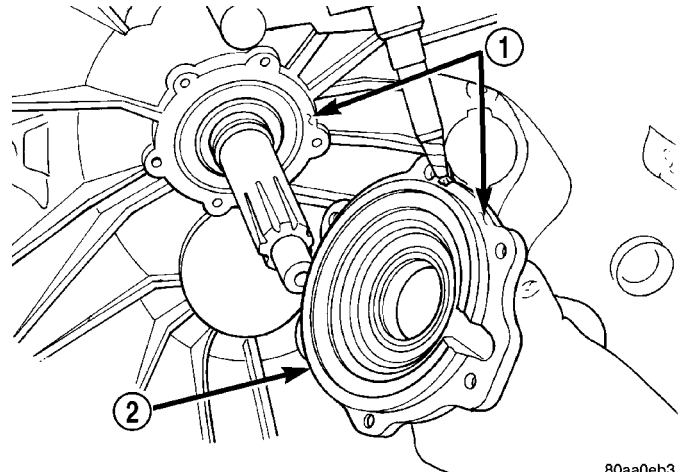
SEAL BEARING RETAINER AND HOUSING
